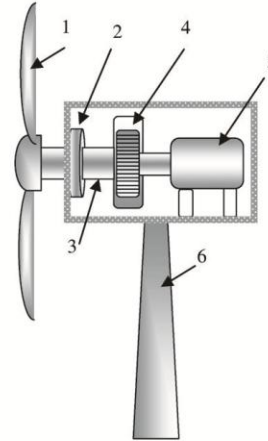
Schematic of wind turbine: 1. blade, 2. Bearing, 3. Shaft, 4. Gearbox, 5. Generator, 6. Tower.
